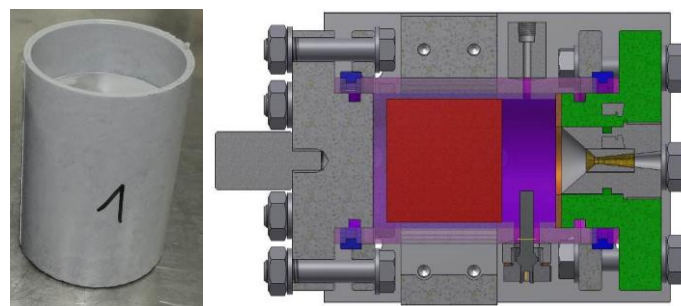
Grain with insulation and axial cross section of the combustion chamber with the nozzle pointing to the right
